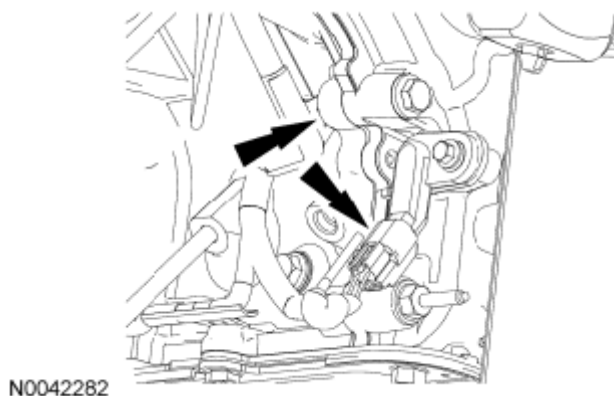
Identifying Crankshaft Position Sensor Electrical Connector And Wiring Harness Retainer
